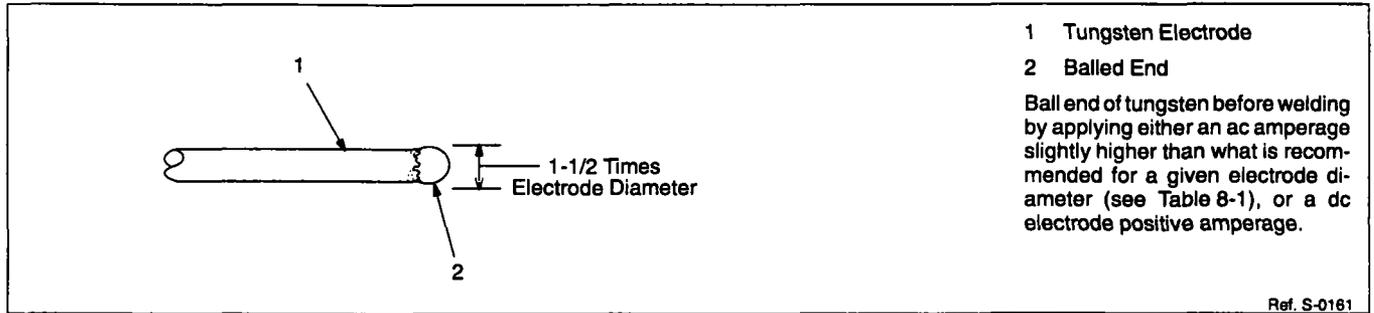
Preparing Tungsten For AC Or DC Electrode Positive (DCEP) Welding
